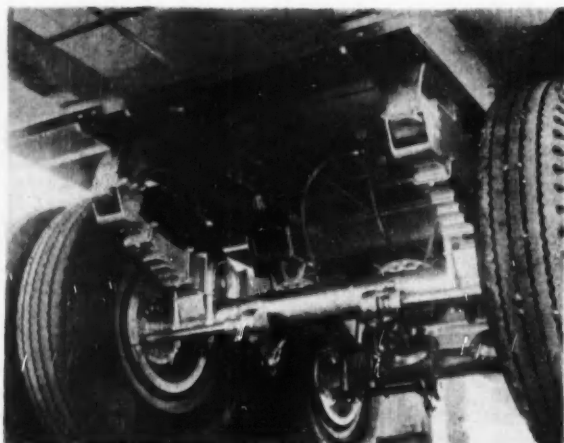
Inverted U-bolt design prevents flattening of bolt where it makes line contact with axle tube in conventional design. Note brake slack adjusters are outboard of both axle tubes to give accessibility for adjustment and shortest matched brake hose length
